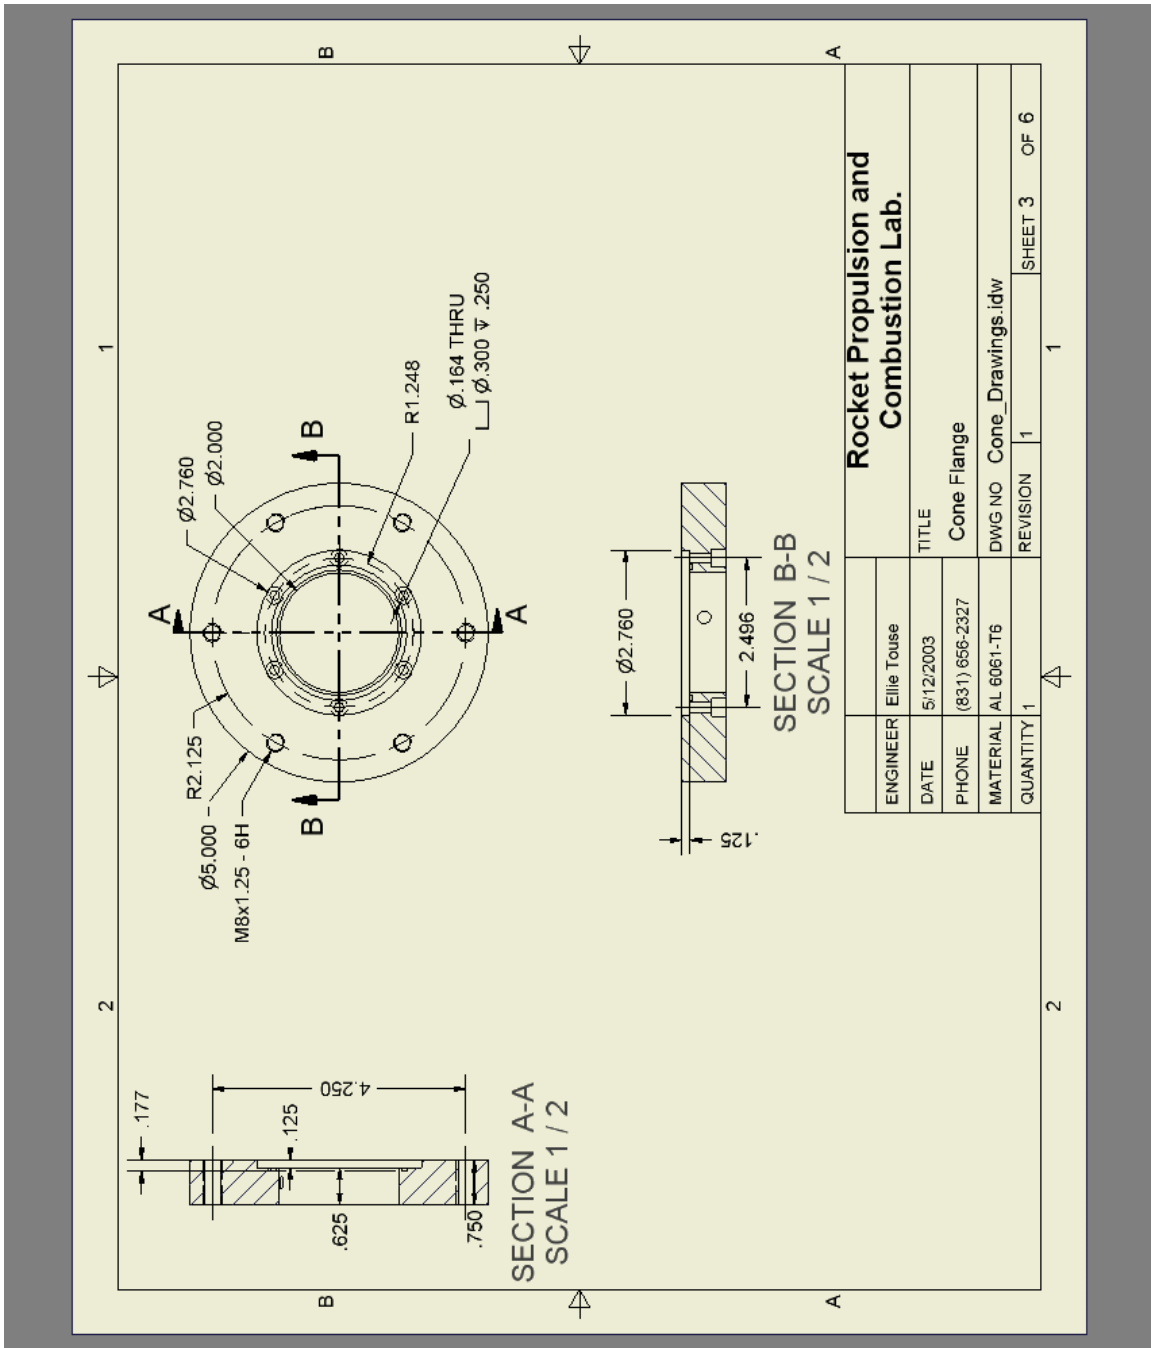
Cone Flange for Axisymmetric Test Section (Drawing 1 of 3)
